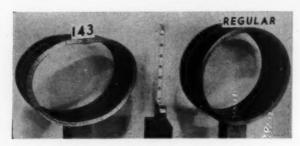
Pieces of 8-in. pipe used for ring crushing tests.
